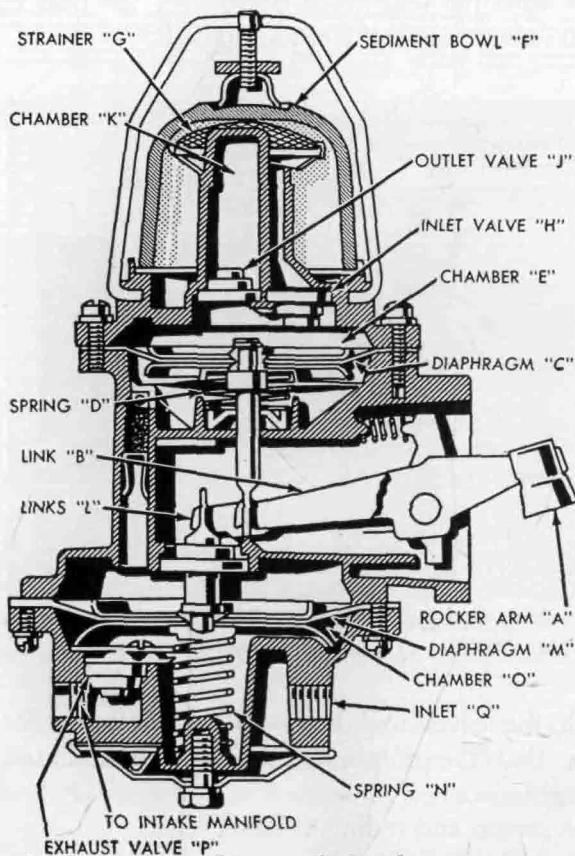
Sectional view of combination fuel and vacuum pump. (*Ford Motor Company*)
